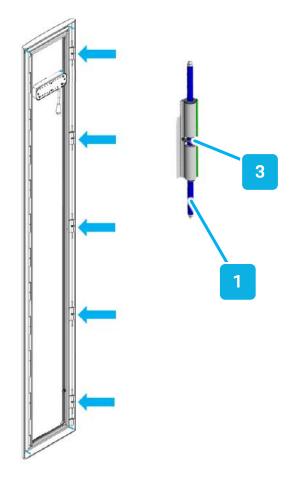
Door version 2: Hinge bolts (1) secured with circlips (3)
